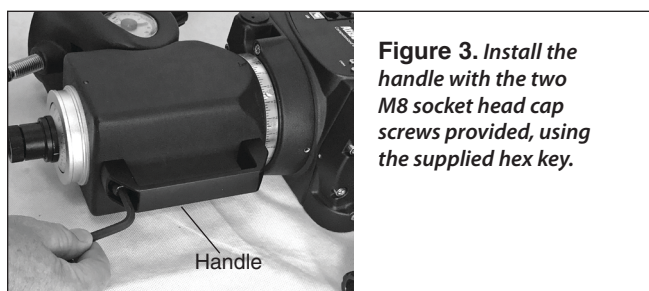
Install the handle with the two M8 socket head cap screws provided, using the supplied hex key.
